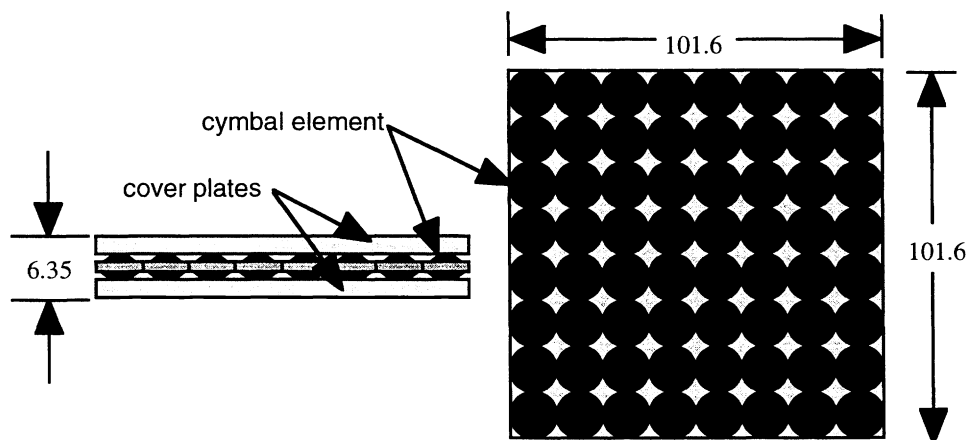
Side and top views of cymbal driven projector panel (dimensions in mm)<sup>13</sup>.
